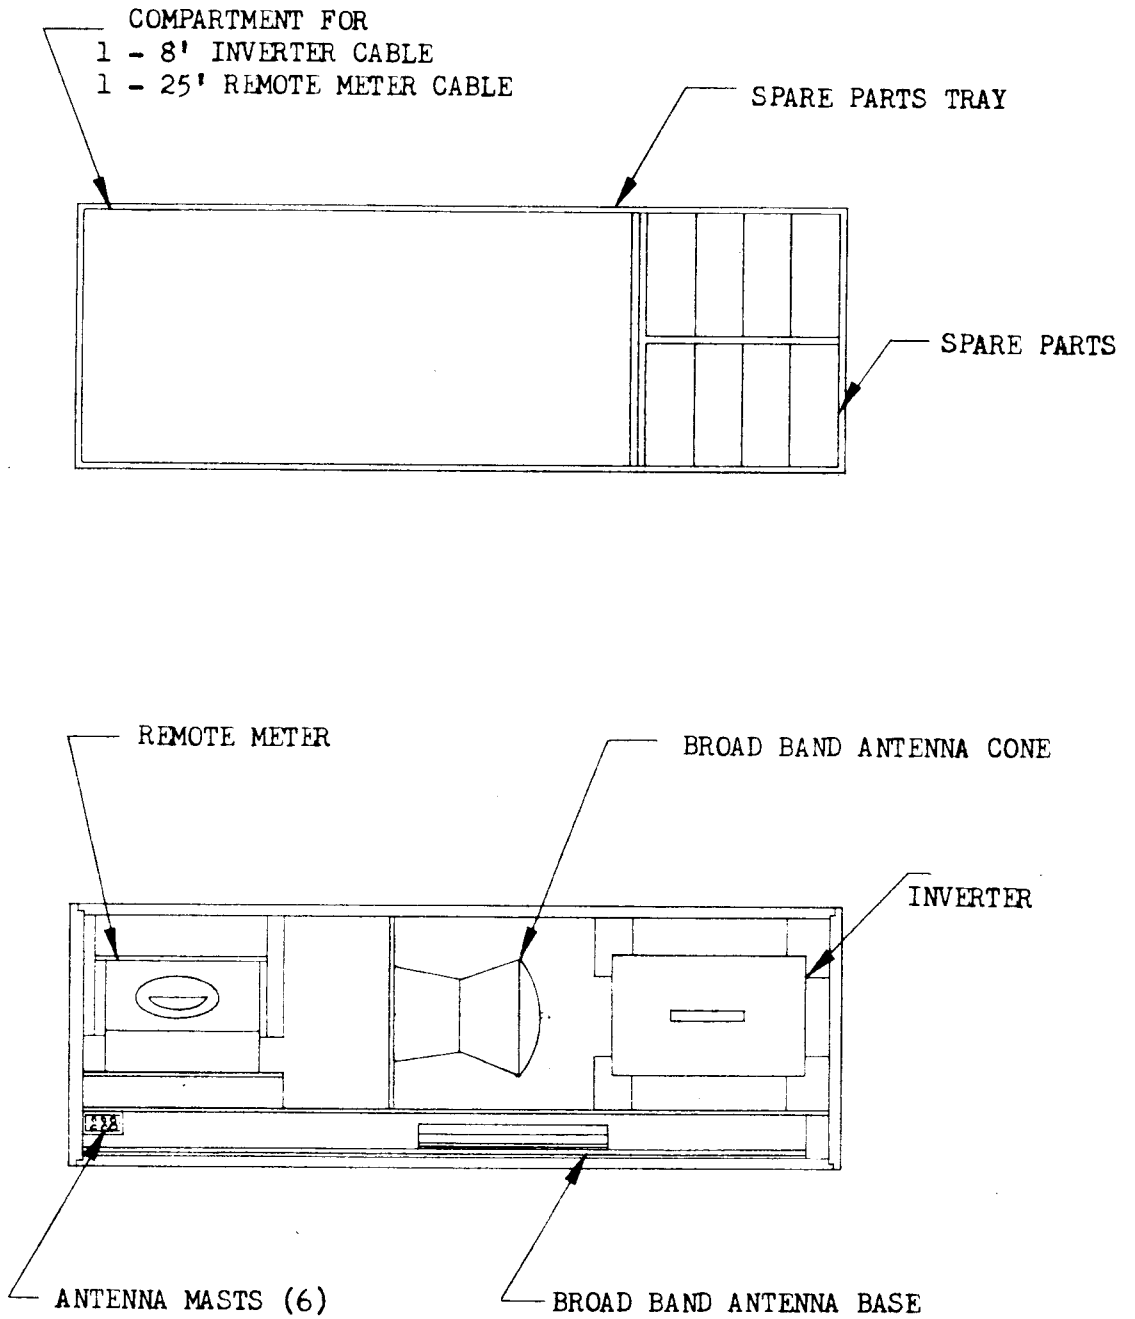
ARRANGEMENT OF PARTS IN OPTIONAL EQUIPMENT
